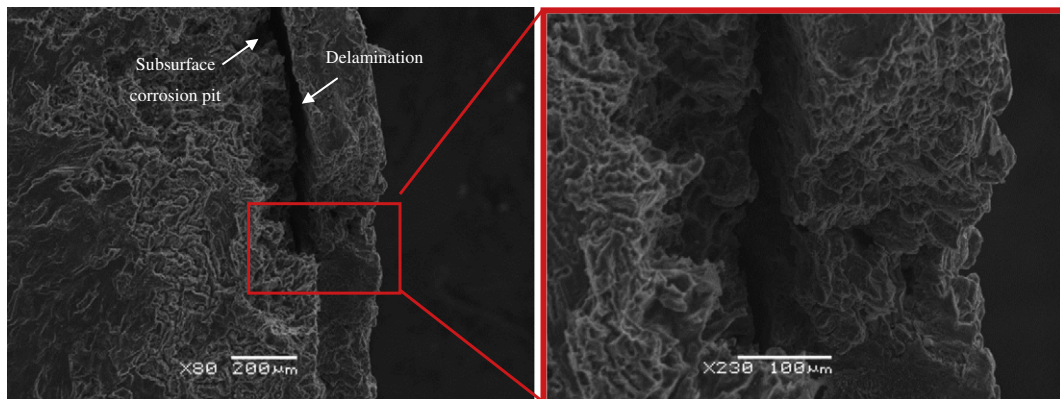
SEM images of fracture surface of a coated sample showing magnified view of cracking of Al cold spray coating at a stress level of 80 MPa in the corrosion fatigue test, and showing corrosion cell between the coating and substrate.
